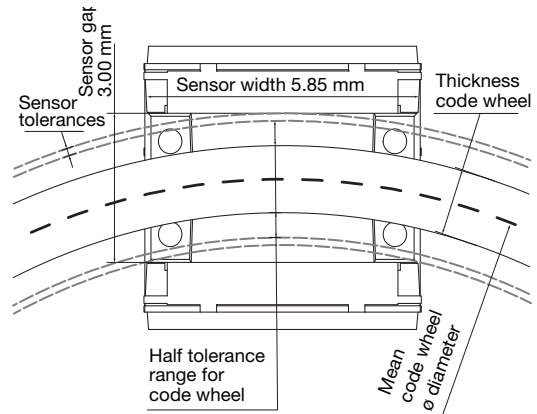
Code Wheel Design for Axial Arranged Encoding Positions. The Picture Shows the TCUT Sensor From the Top View With an Encoder Ring Arranged in the Center of the Sensor
